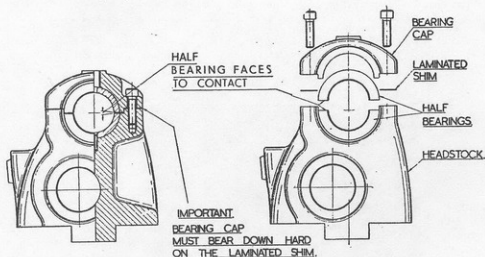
Showing Method of Adjusting ML7 Lathe Headstock Bearings.
